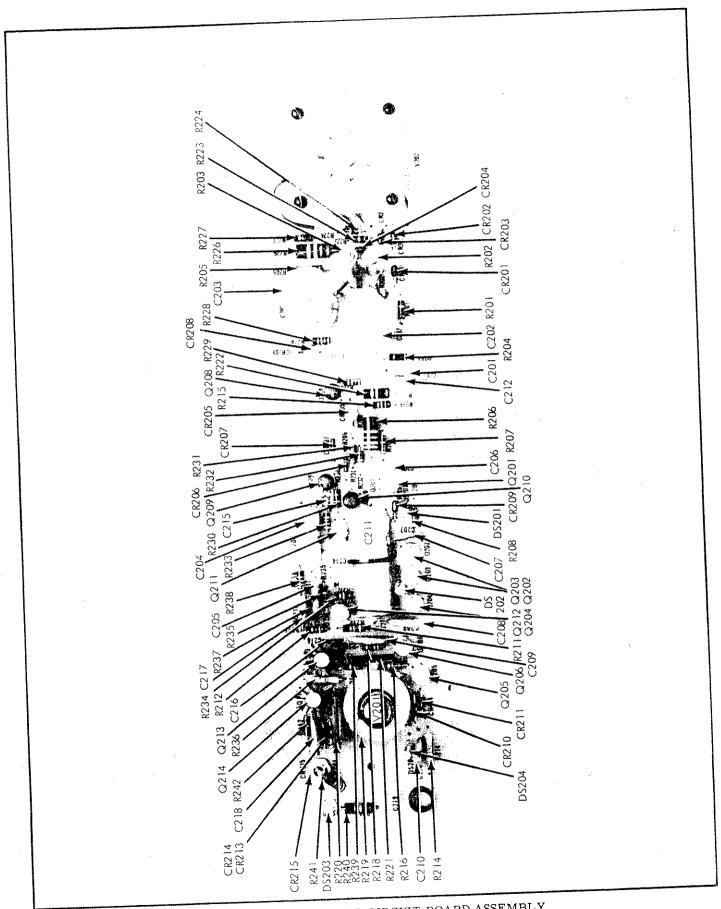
AMPLIFIER CIRCUIT BOARD ASSEMBLY
